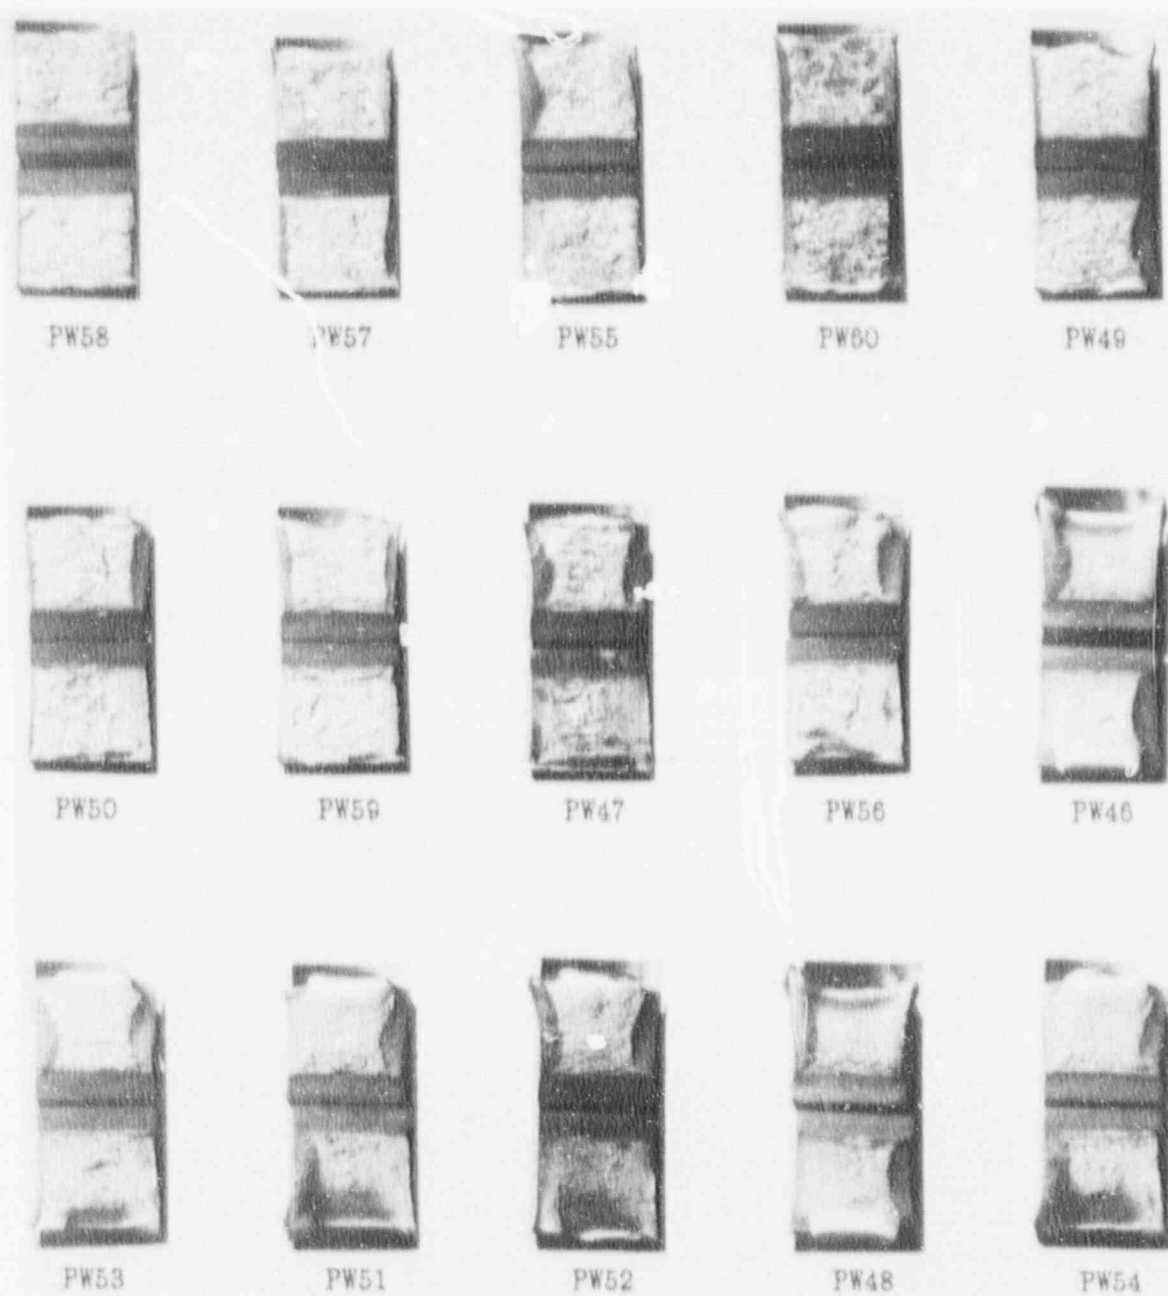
Charpy Impact Specimen Fracture Surfaces for Diablo Canyon Unit 2 Reactor Vessel Weld Metal
